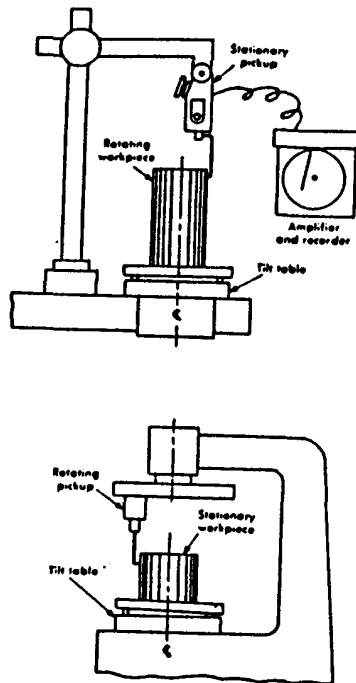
(Upper) Rotating workpiece and (Lower) rotating pickup types of precision spindle instruments for roundness measurements.
